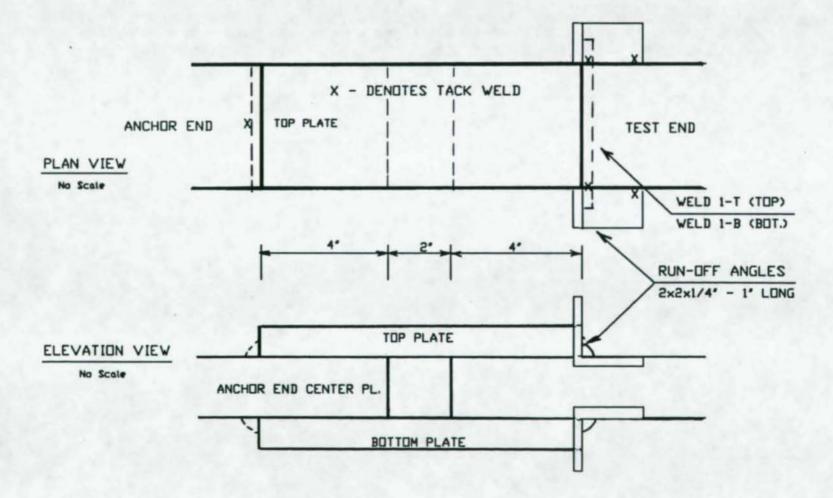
Fabrication of Transverse Weld Specimens
